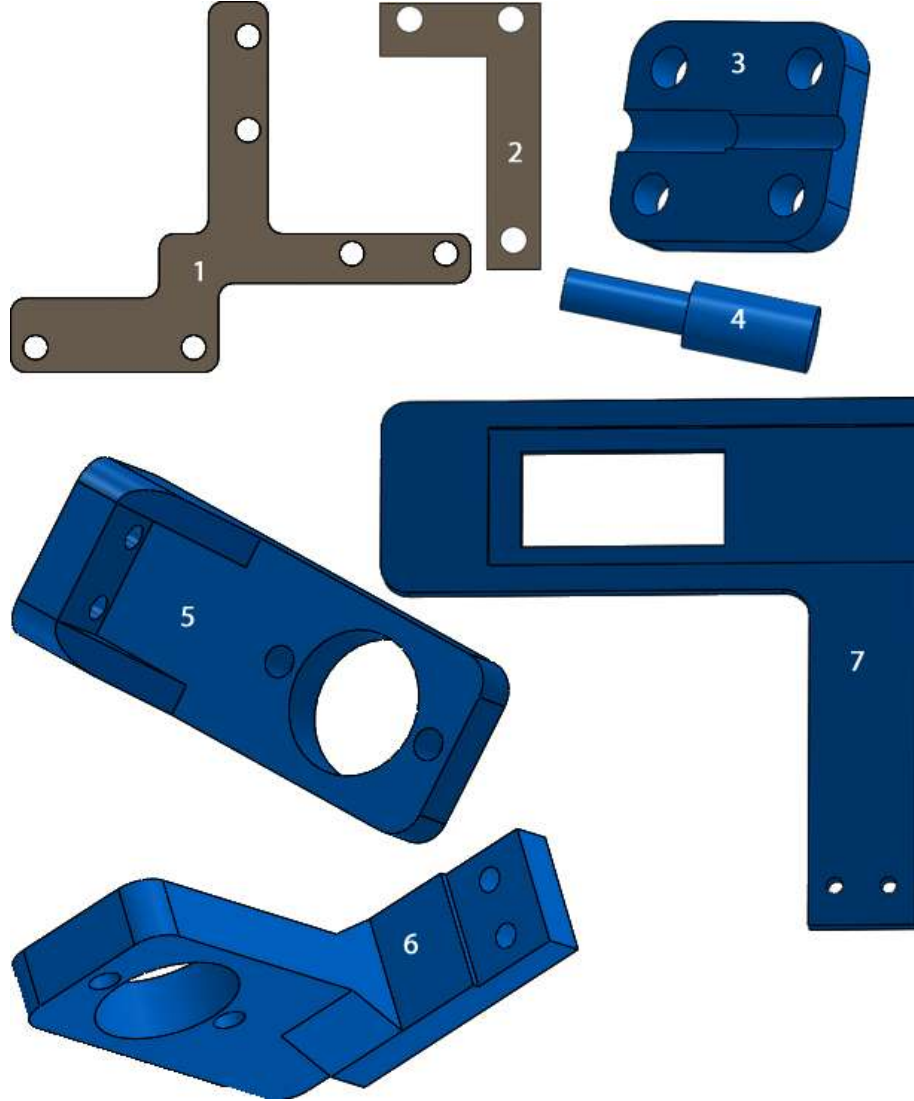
Focusing step motor (Z-axis) and carrier stage motor stop module holder (1), Specimen holder step motor stop module holder (X-axis) (2), Coupling that connects the fine adjustment screw and step motor shaft (3), Part that connects the ball screw driving the carrier stage and the step motor (4), Part that transmits linear motion to the carrier stage (5), Part that transmits linear motion to the specimen holder (6), Specimen holder (7).
